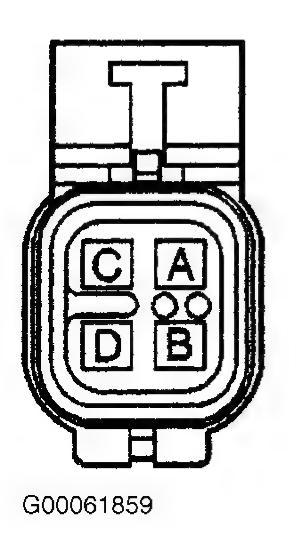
Identifying Fuel Sender Unit Connector Terminals (4.3L Engines) Courtesy of GENERAL MOTORS CORP.
